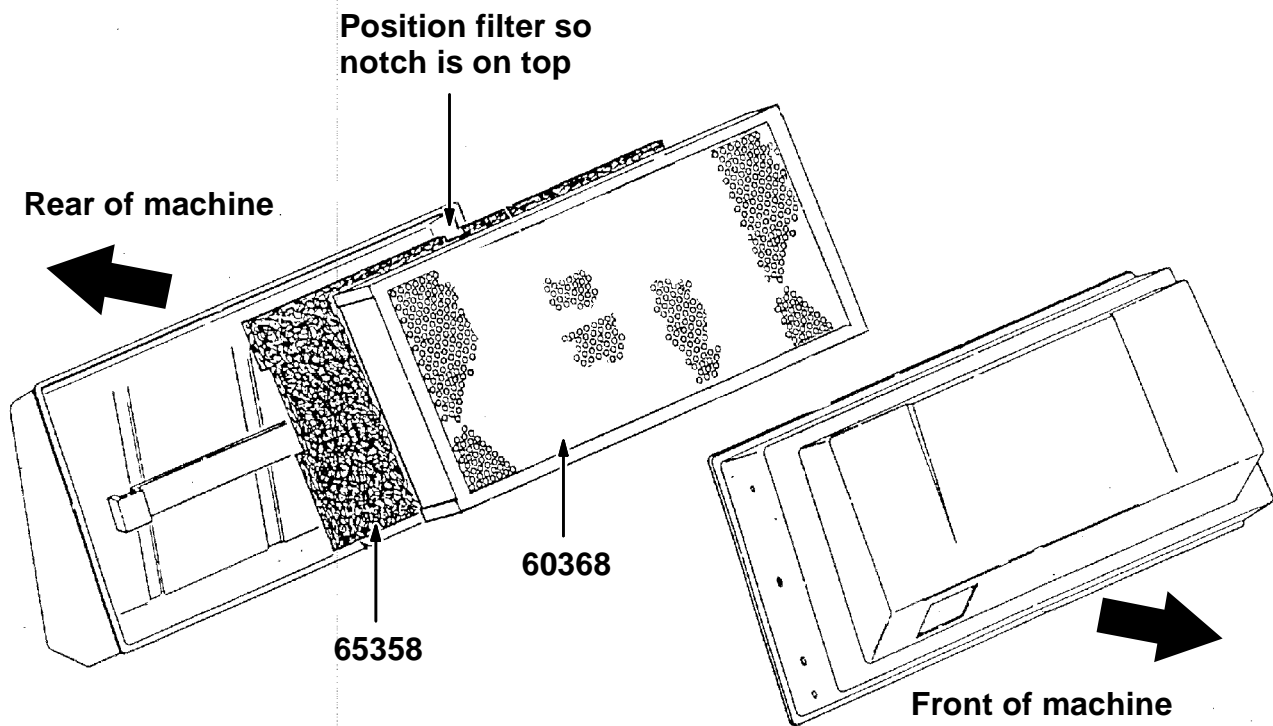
CARPET LINT DUAL FILTER ASSEMBLY
